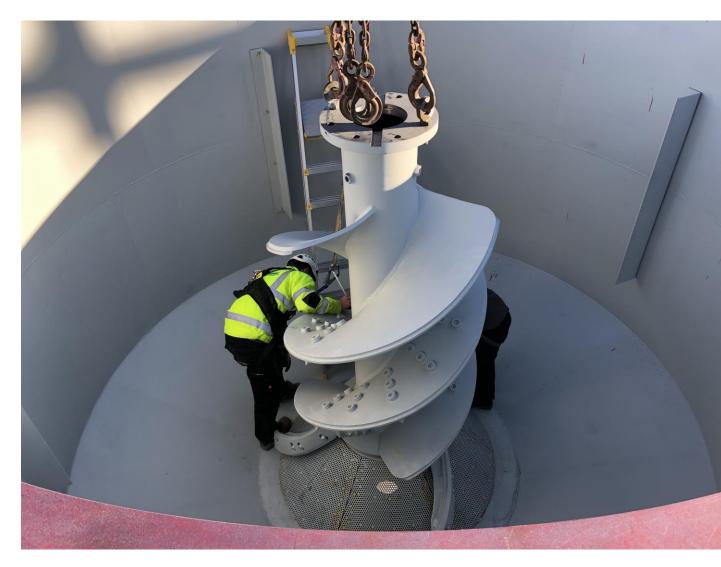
BTA Pulper Installation (here the impeller inside the Pulper)
